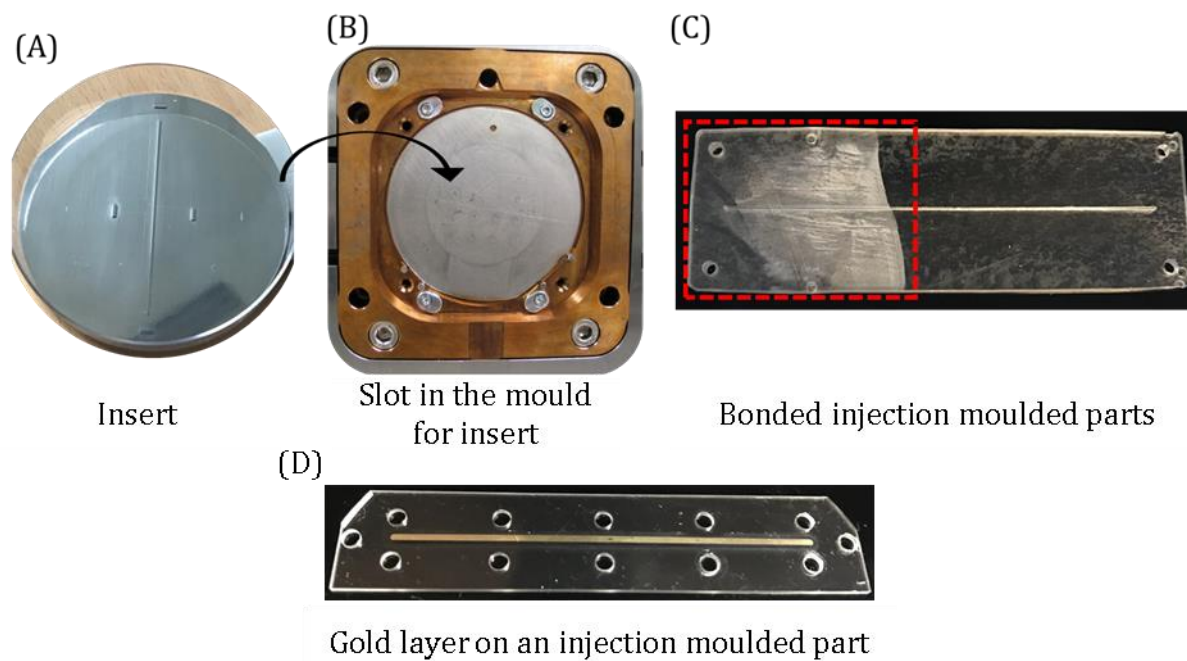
(A) Micomilled and polished aluminium insert with a central channel, (B) the mould insert of the injection moulding machine, and (C) two injection moulded COC parts bonded together. The dotted red square indicates the efficiency of bonding after trying to pull the pieces apart. (D) Gold layer deposited on an injection moulded part. The holes were micromilled later.
